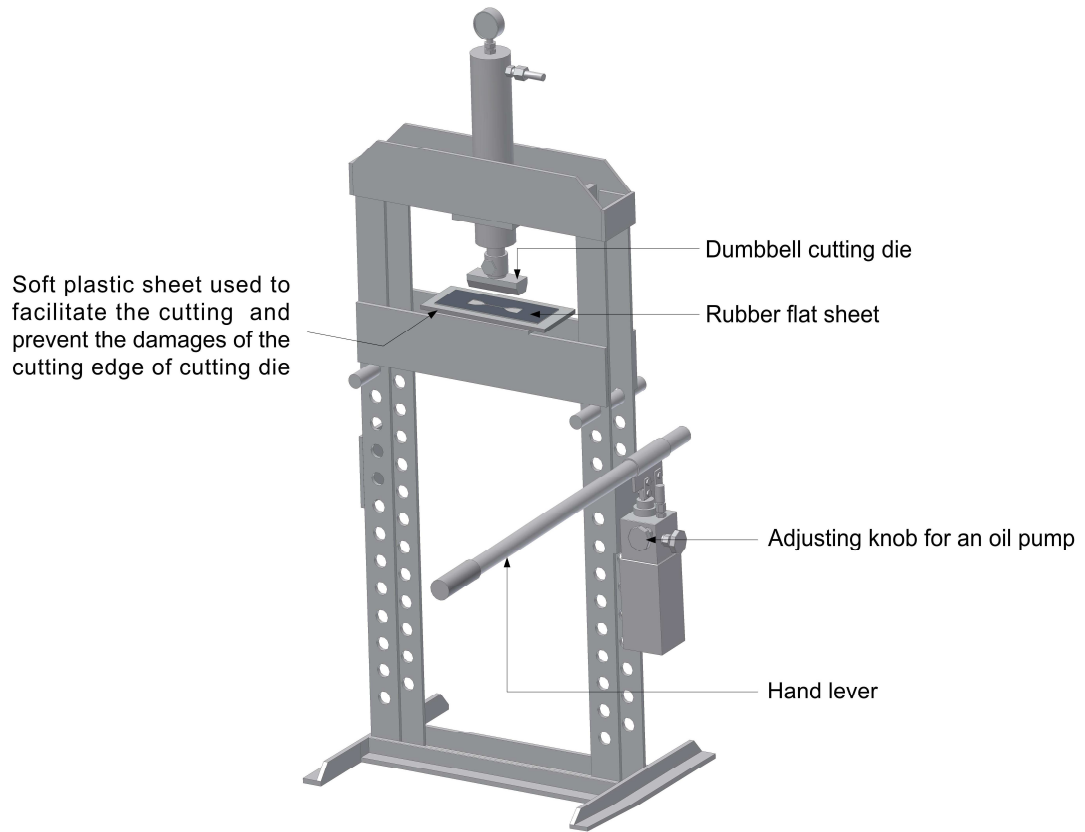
A hydraulic press used to stamp out the dumbbell specimen.
